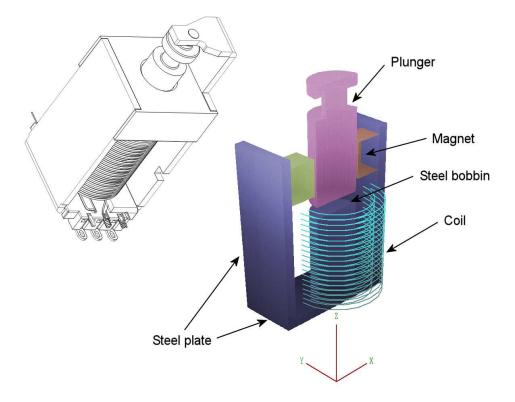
Latching solenoid assembly – drawing and three-dimensional mesh. The parts are displayed in the space y > 0.0 mm and the coil in y < 0.0 mm. The plunger has diameter 10.0 mm and length 28.0 mm.
